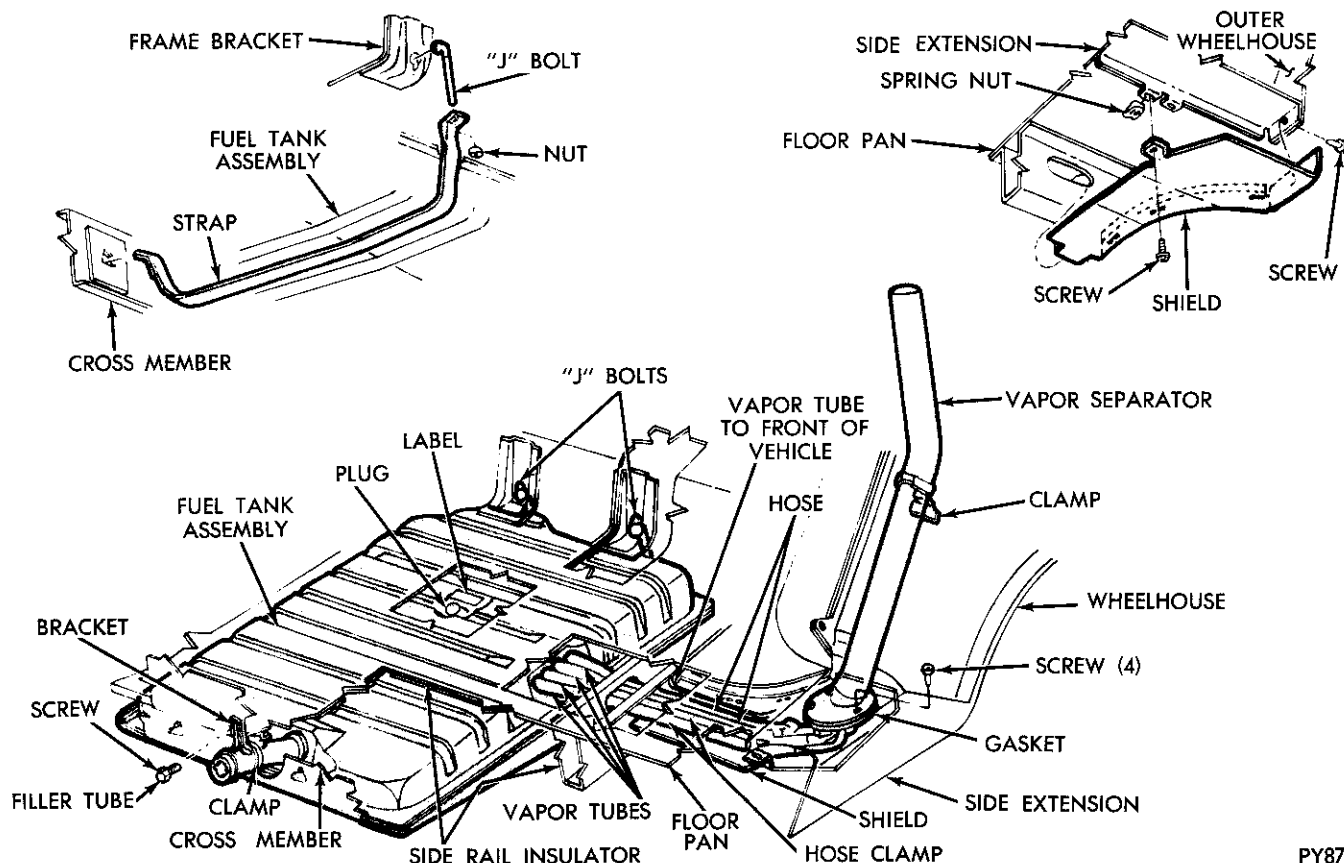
Fuel Tank Assembly (E.C.S.) Evaporation Control System—Sedans
